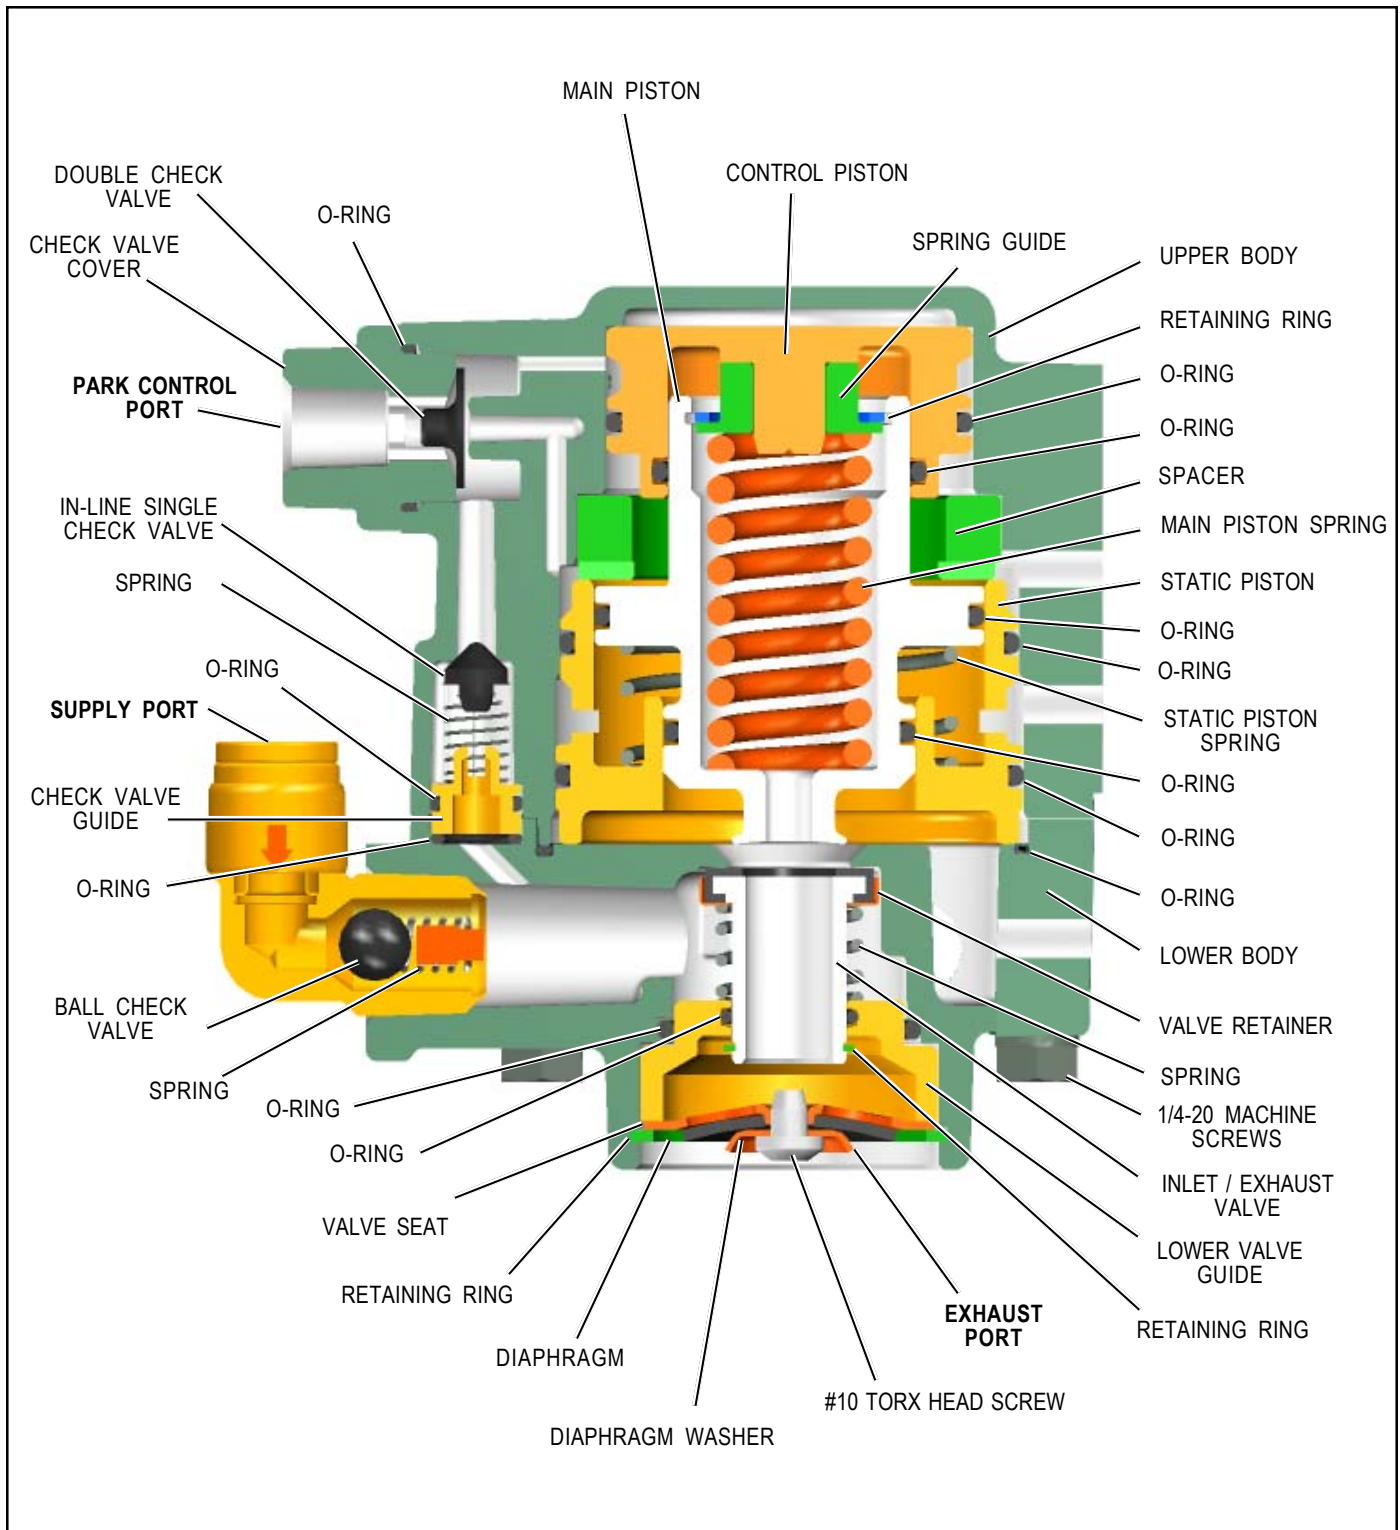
SECTIONAL VIEW OF SR-7 USED IN RELAY VALVE APPLICATIONS
